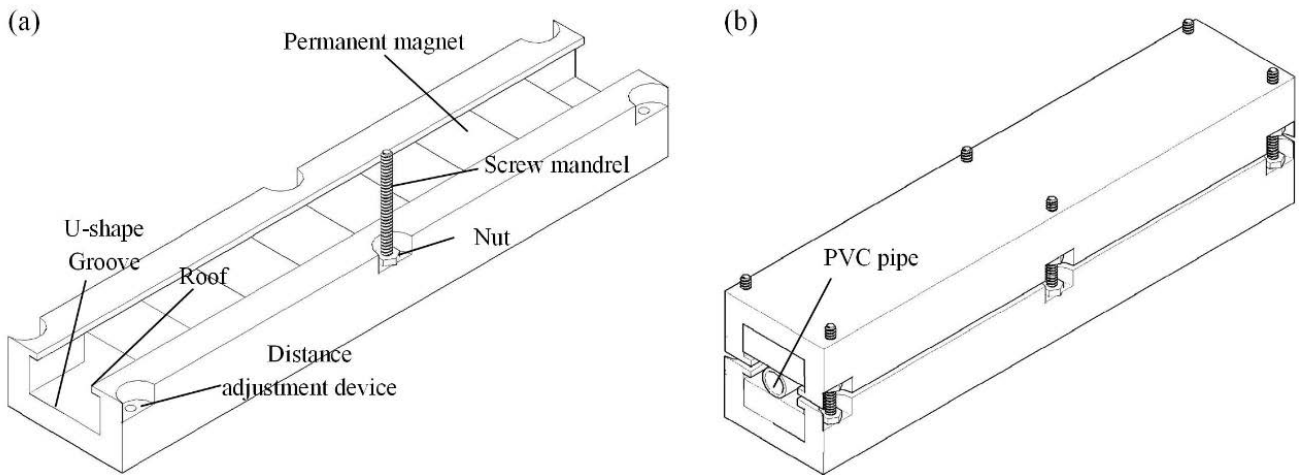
Structure diagram of the magnetizing equipment: (a) U-shape grooves and the position of permanent magnets and (b) half side view of the magnetizing equipment.
